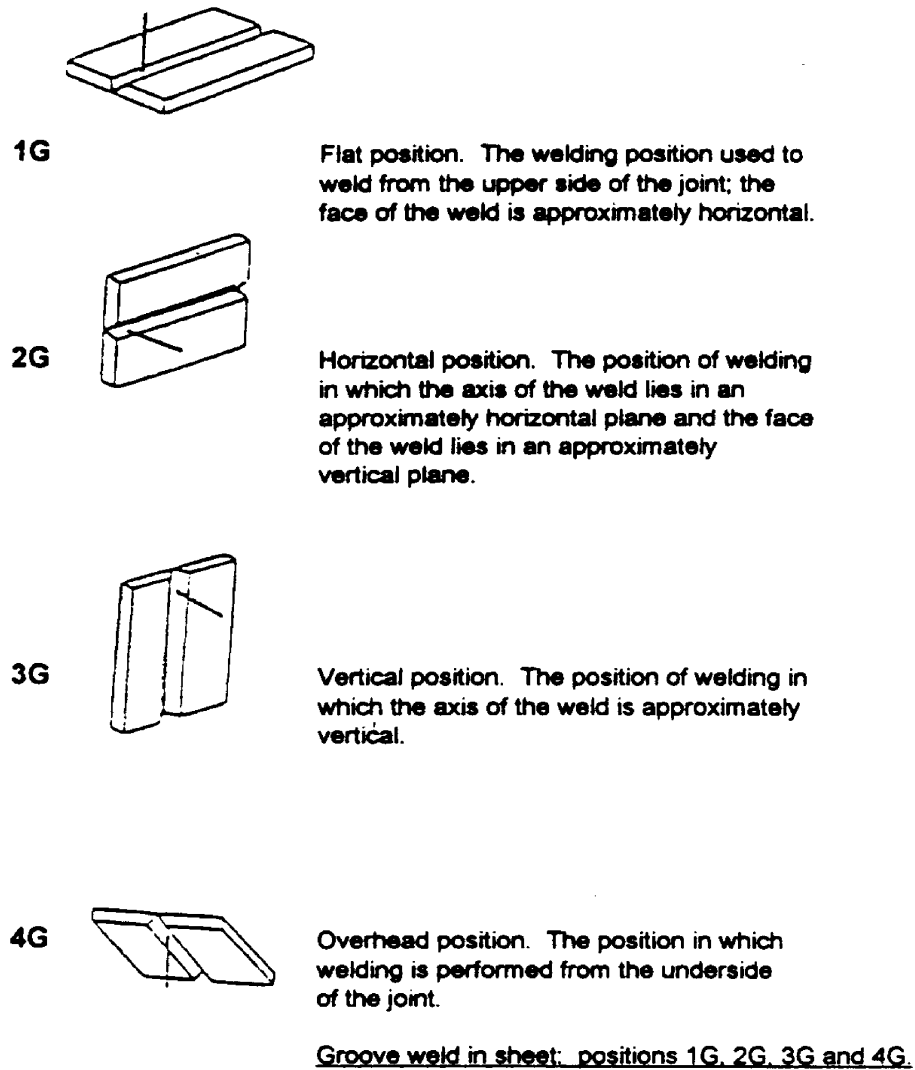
Weld Positions (from Table 3-1) (Sheet 1 of 4)
